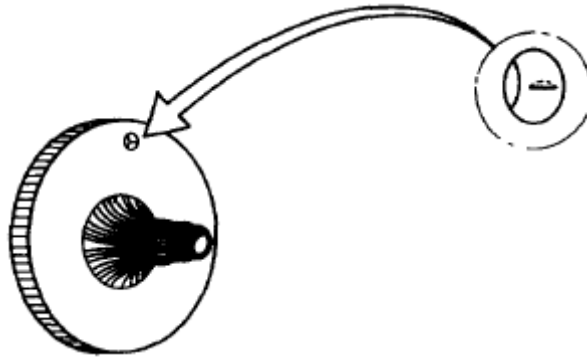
Idealized turbine disc with web cooling hole. The detail shows a semi-elliptical surface crack at the hole (modified from [3]).
